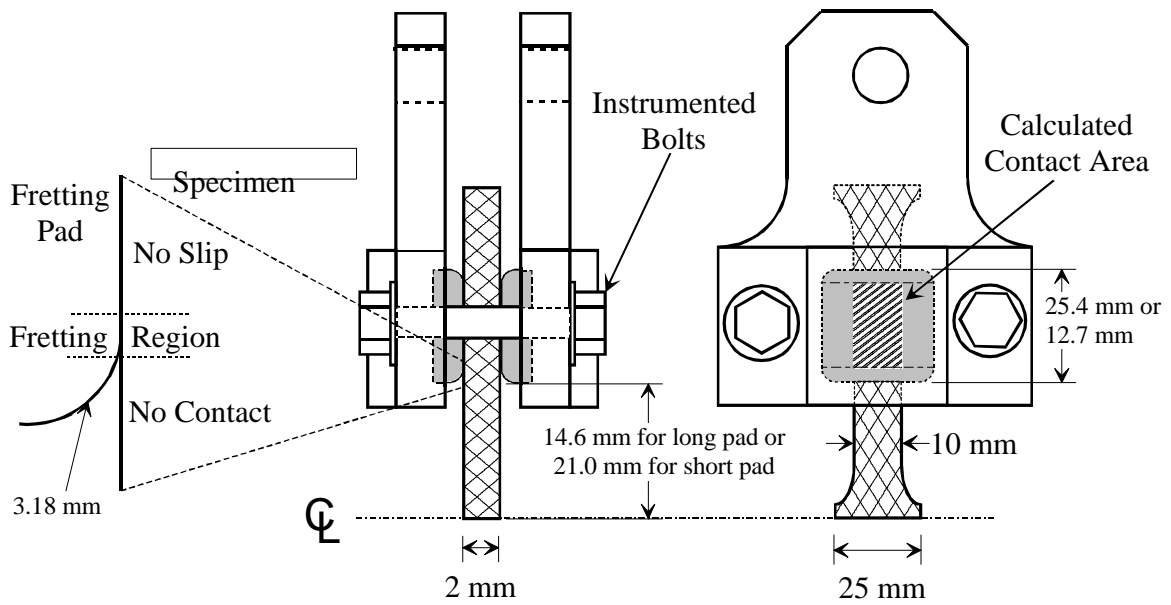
Test fixture schematic indicating pad lengths, distance from center of specimen to lower edge of pad, and blending radius at edge of contact.
